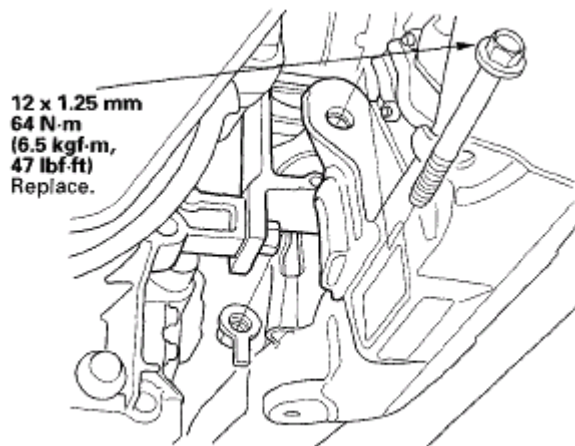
Identifying Front Mount Mounting Bolt (With Torque Specifications)
